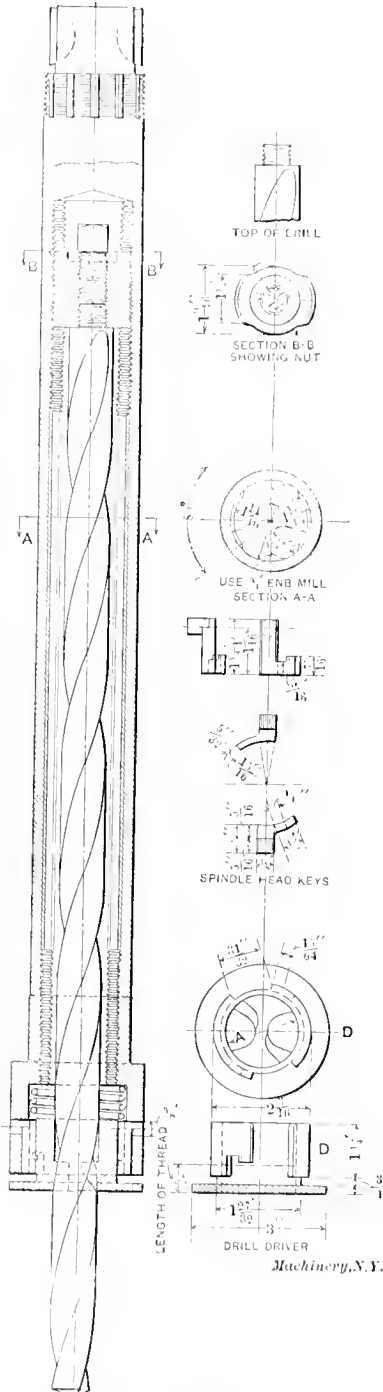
Details of the Construction of Drill Spindle Sleeve.
